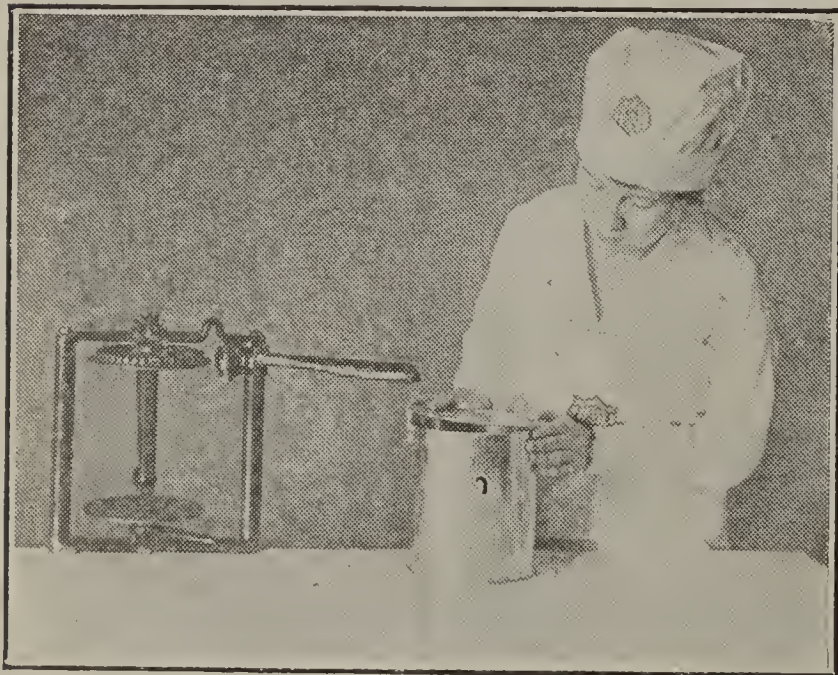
Sanitary rim-seal can, and machine for crimping and sealing.
